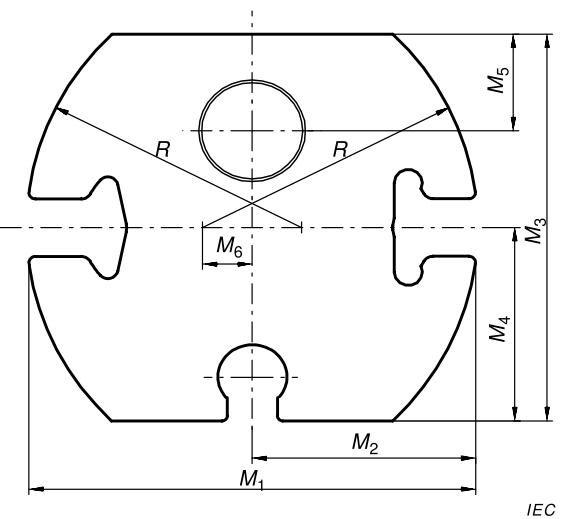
Dimensions of gauge for ball coupling size 22N
